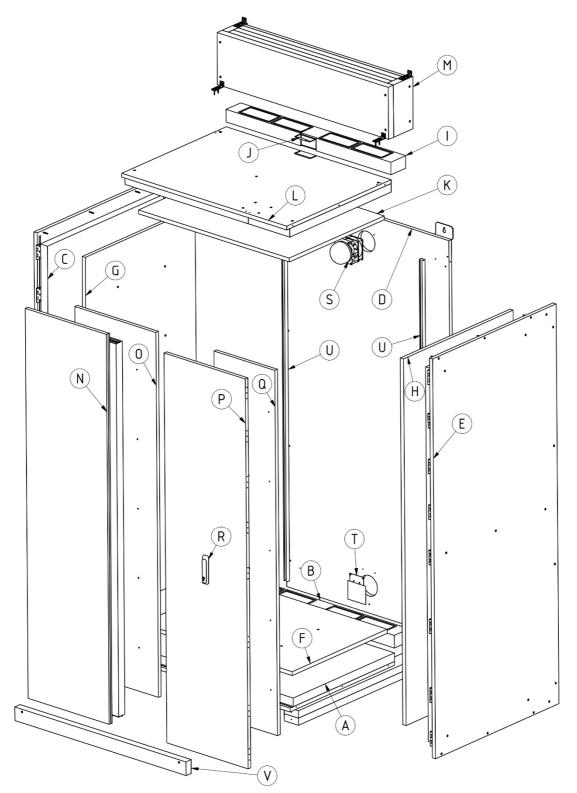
, Exploded view of ESL92 PRIOELEC BIG-Line
